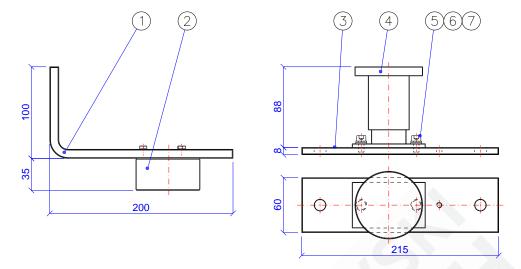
MARC-O60-01.06.00 [E-mag holder assembly]
